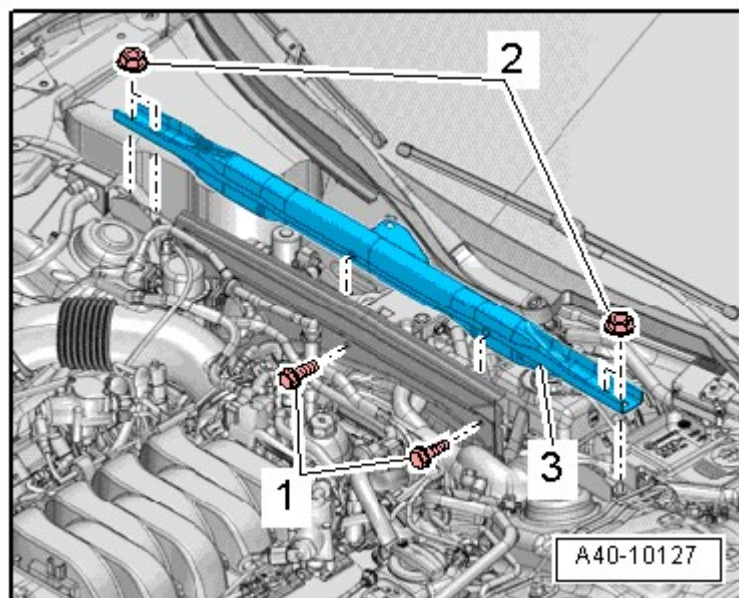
Identifying Bolts, Nuts And Tower Brace
